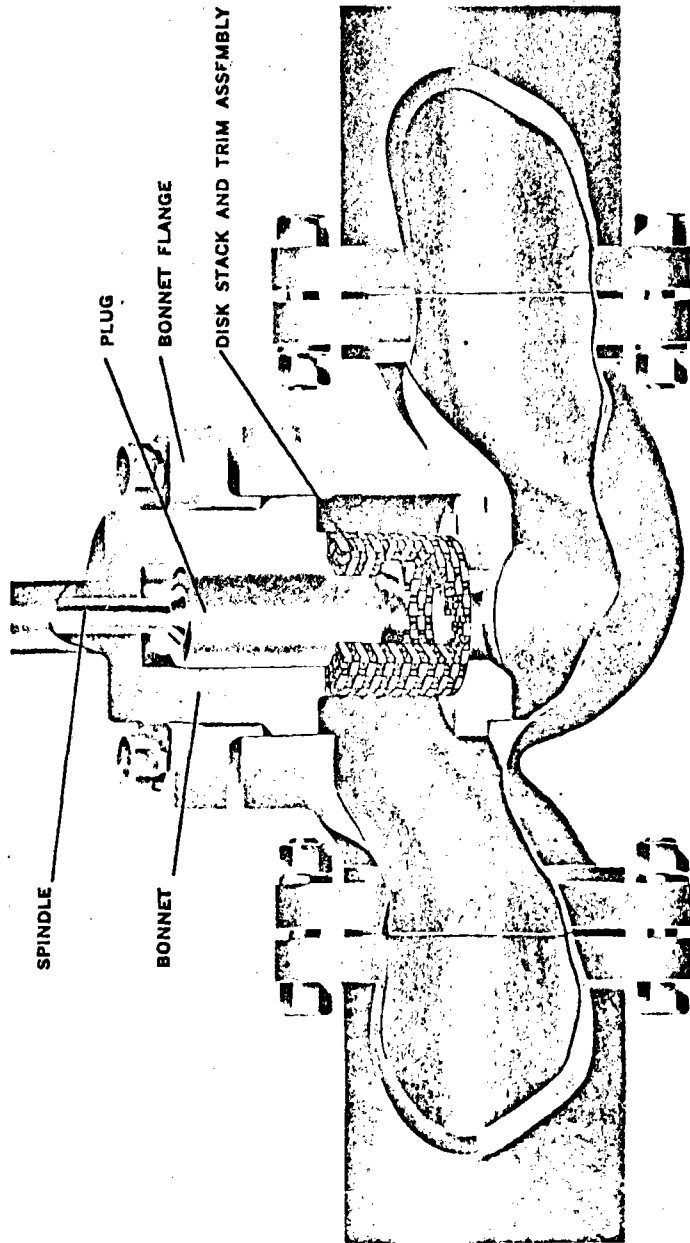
PRESSURE REDUCING DRAG VALVE
